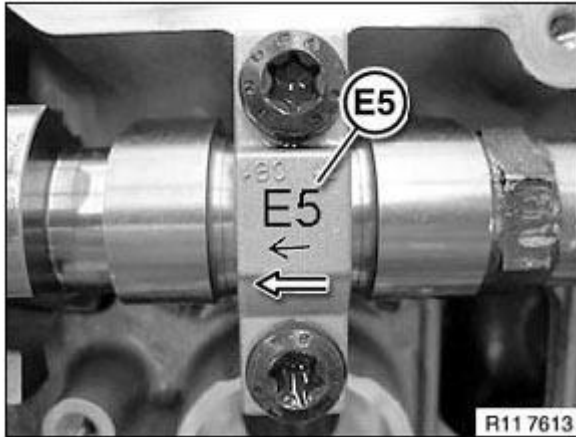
Identifying Exhaust Camshaft Designation
